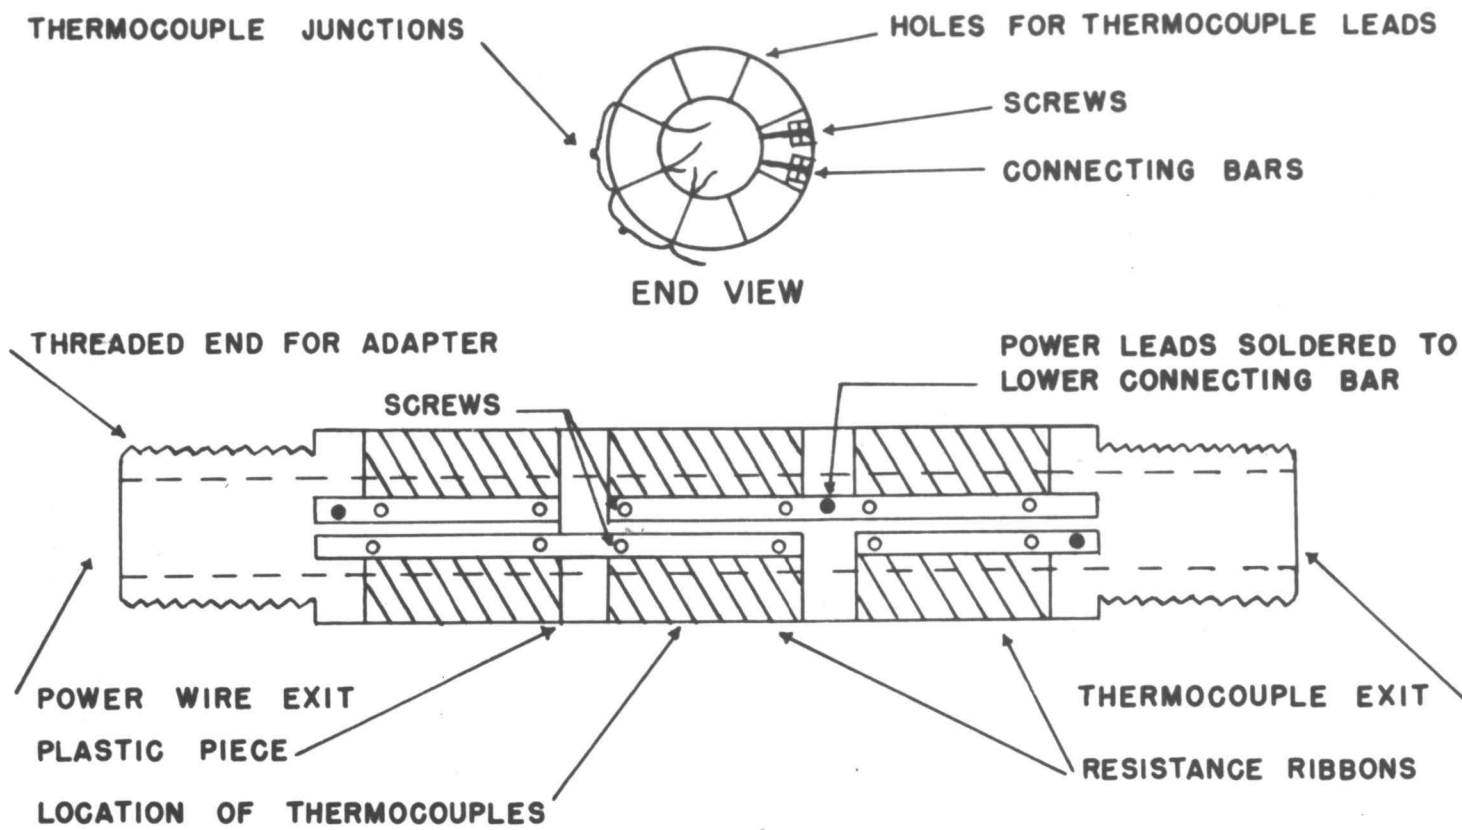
DRAWING OF ASSEMBLED SENSING PROBE
